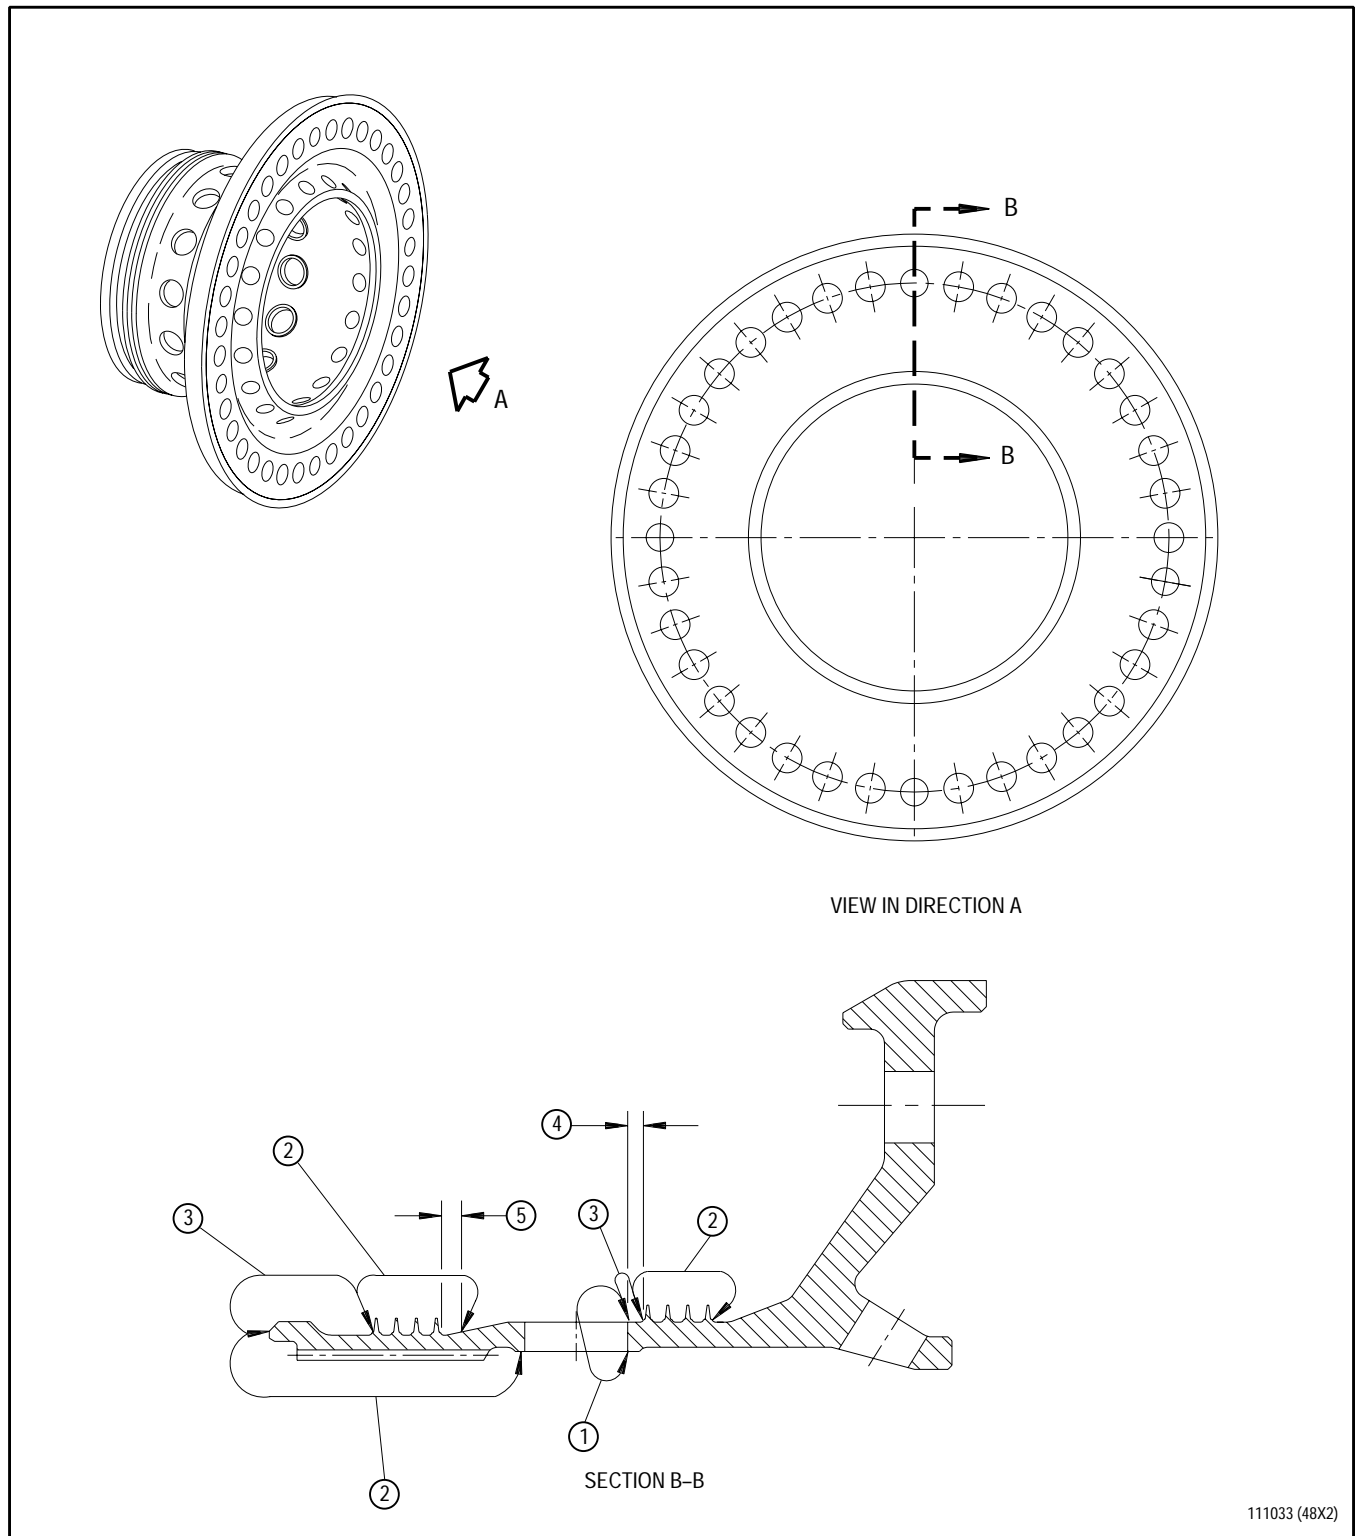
Front Turbine Hub Assembly - Shotpeen of Forward Cooling Hole
